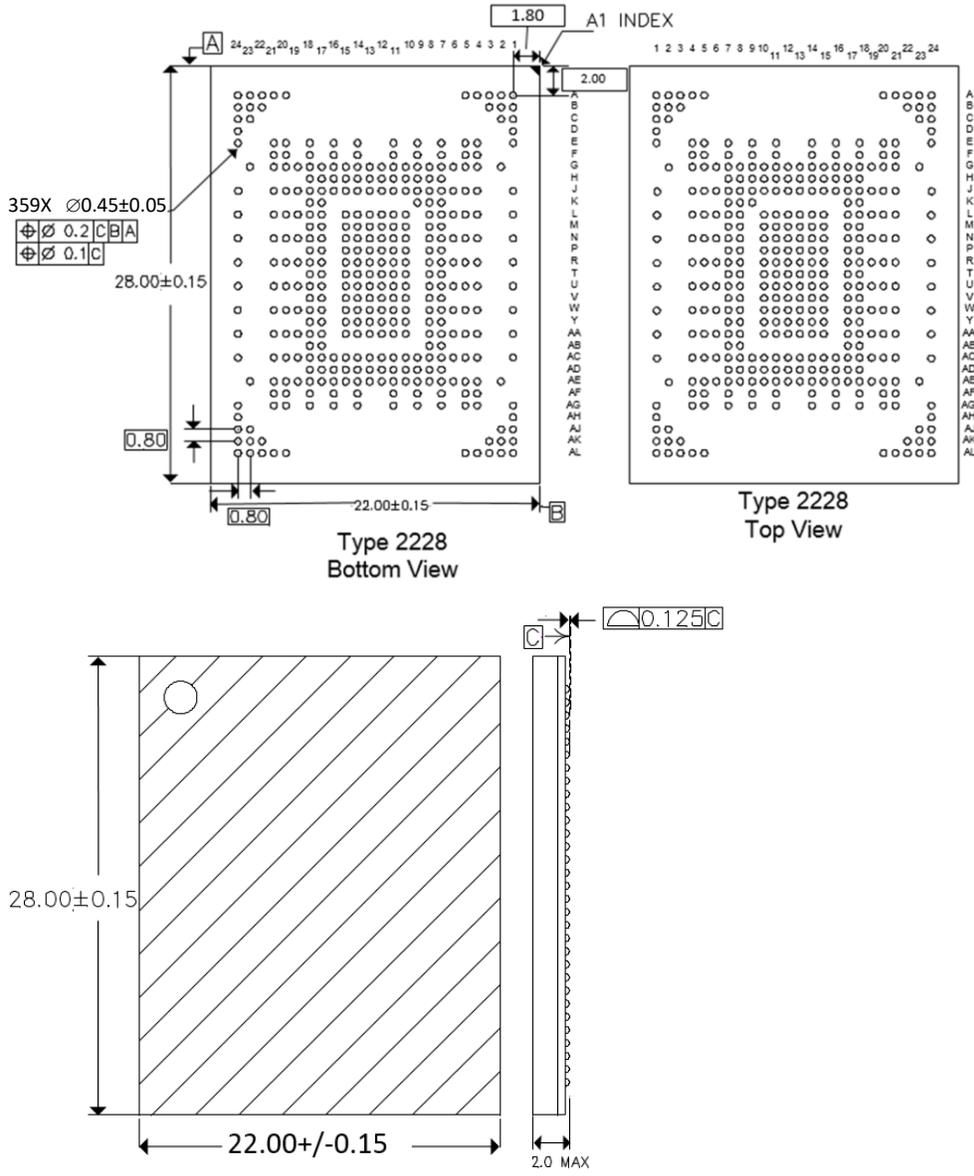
M.2 Type 2228-S5 Mechanical Outline Drawing Example
